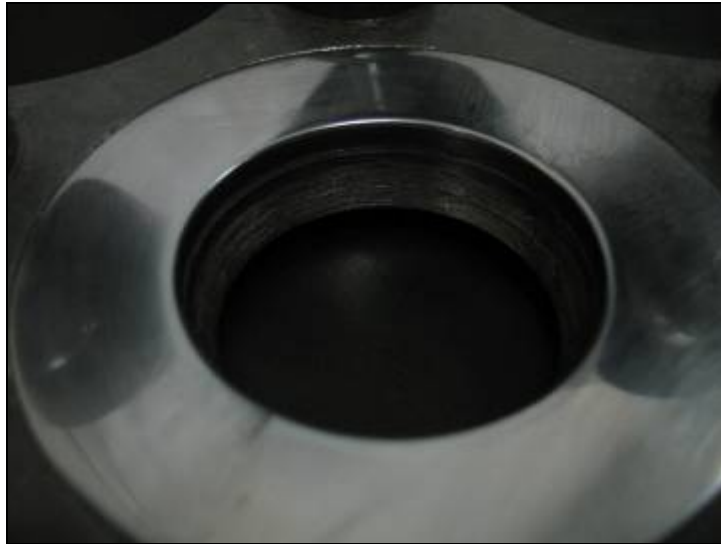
Scrubbing Marks on Ball Mount Adaptor at Wobble Plate
